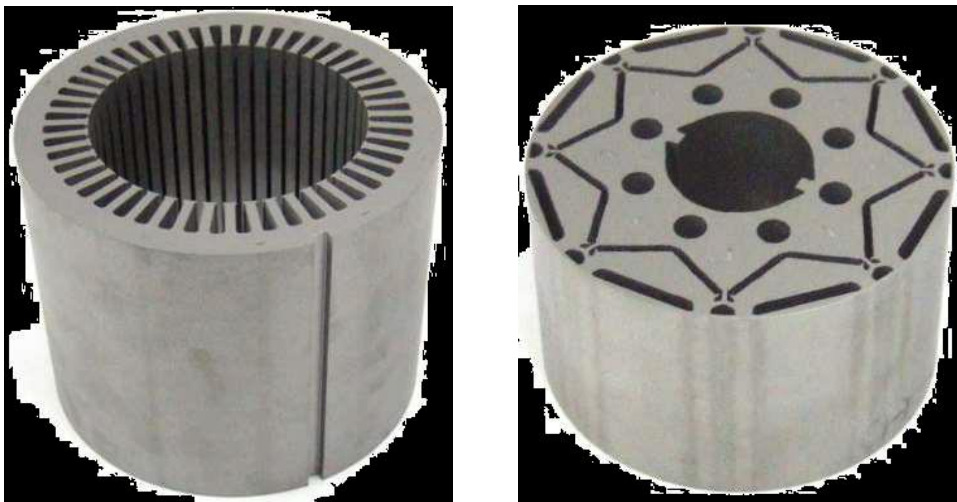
Nissan Leaf electric machine stator and rotor cross section (E-machine [12])
